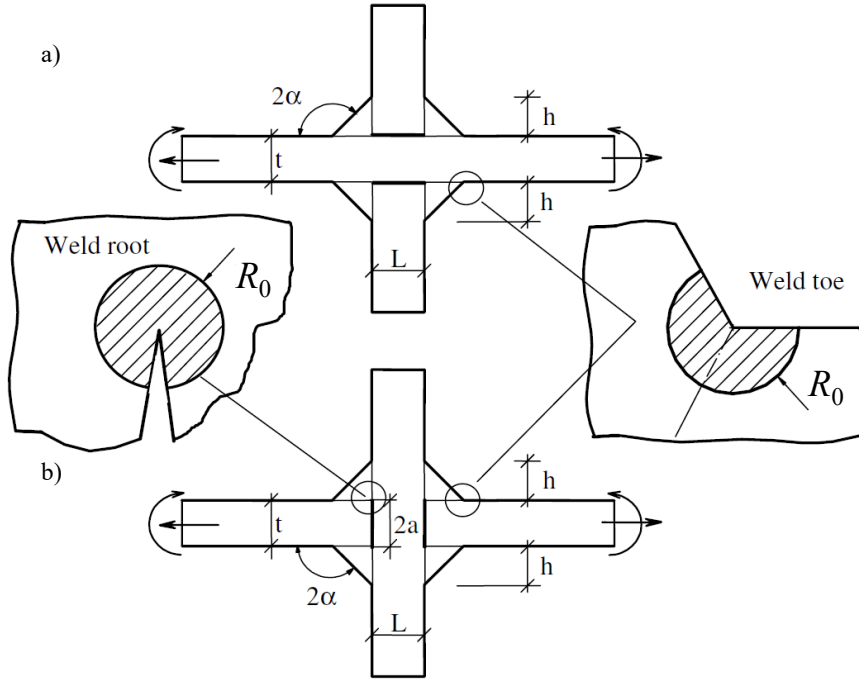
Circular-shaped average SED material-structural control volume with radius R_0 surrounding the crack initiation point, i.e., the weld toe or the weld root, of a) a transverse non-load-carrying fillet welded joints and b) a load-carrying fillet welded cruciform joint.
